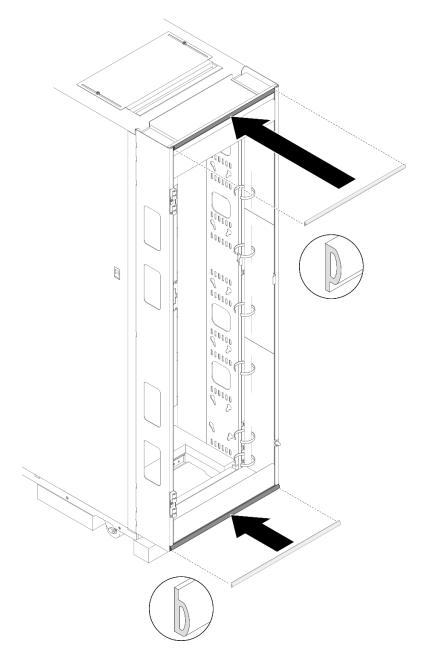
Installing the extension sealing foam to the extension top cover and bottom cover
